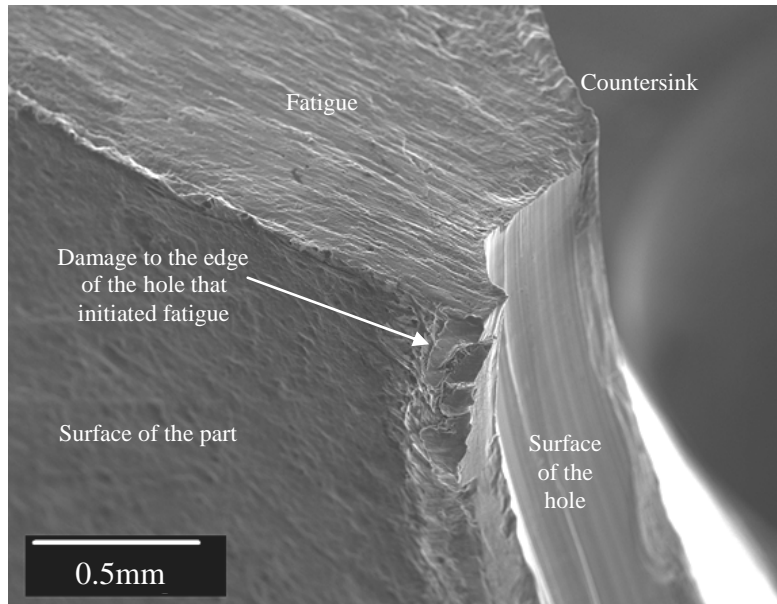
Fatigue cracking initiating from damage to a lip that surrounded a countersunk hole in an empennage extrusion made from AA7075-T6.
